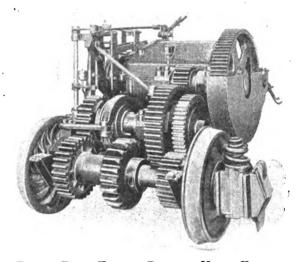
Front View of Traction Motor Unit, Clutches and Brake-Gran.
